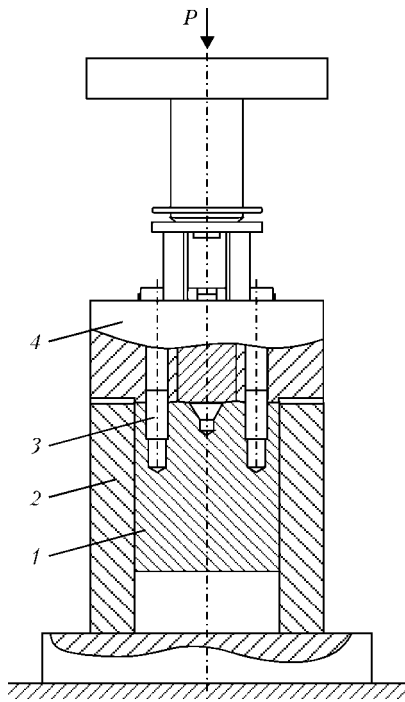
Scheme of device for axle journal testing: 1 – axle journal; 2 – cup; 3 – bolt; 4 – holder
